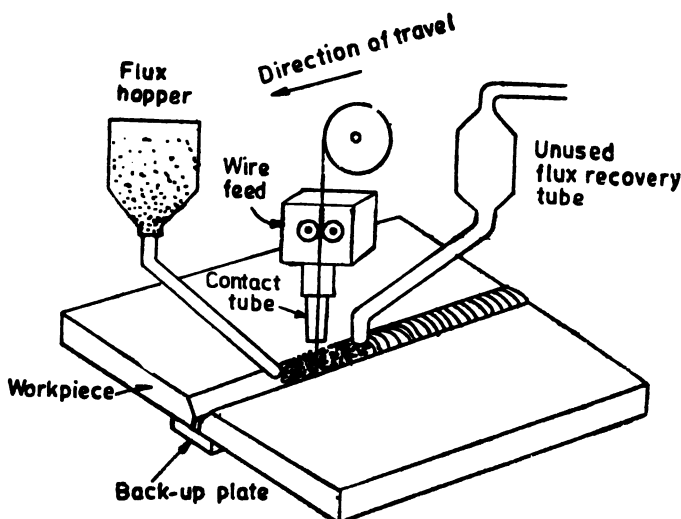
Submerged arc welding unit (Schematic).
